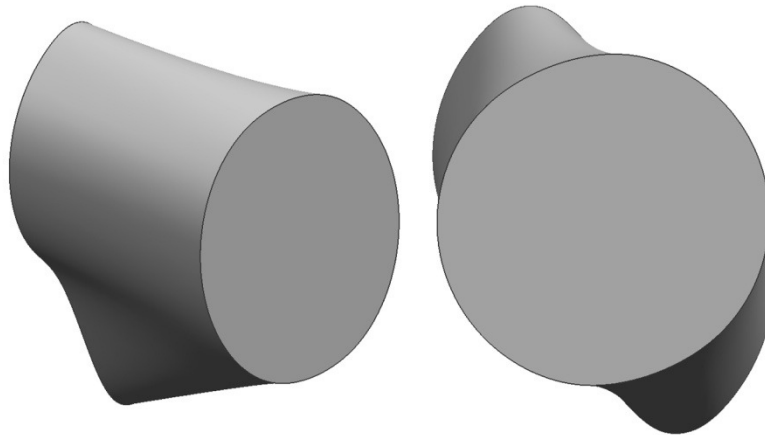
Isometric and front view of a 3-D cammoid model installed in the first prototype.
